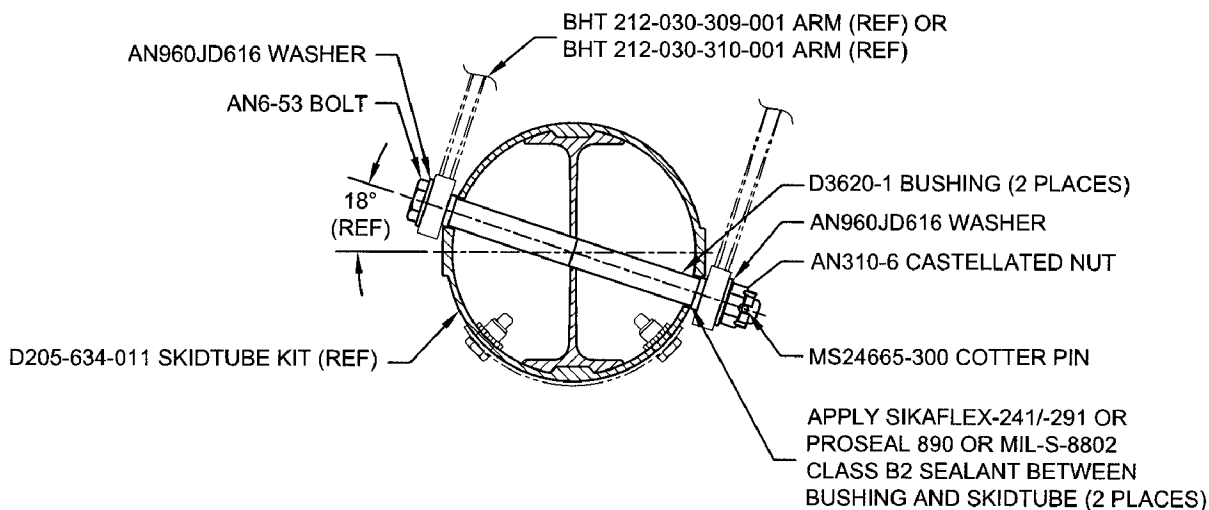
TYPICAL BHT ELECTRIC STEP INSTALLATION
